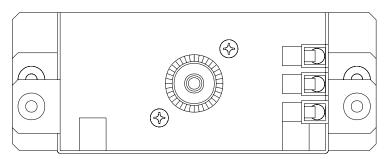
Rear view of UHF housing with interlock (back plate removed)
